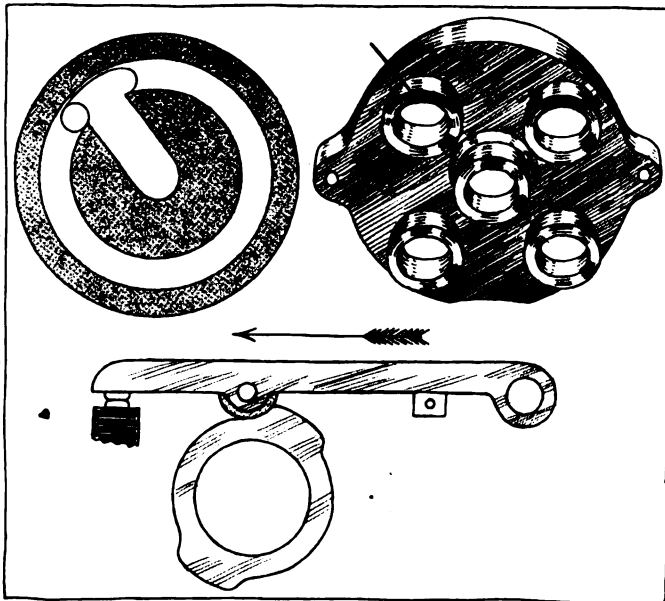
Position of distributor and opening in cover to which the wire from number one cylinder is connected; a view of the circuit breaker
